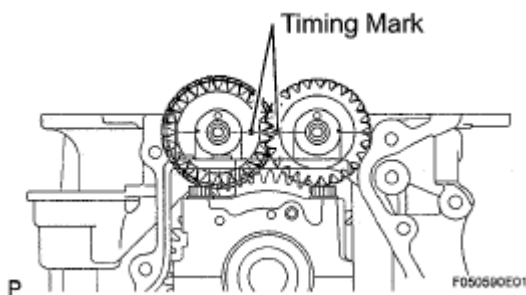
Identifying Matchmarks Of No. 1 And No. 2 Balance Shafts
